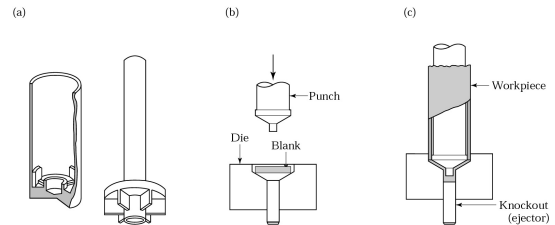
(a) Two examples of products made by impact extrusion. These parts may also be made by casting, by forging, or by machining; the choice of process depends on the dimensions and the materials involved and on the properties desired. Economic considerations are also important in final process selection. (b) and (c) Impact extrusion of a collapsible tube by the *Hooker process*.
